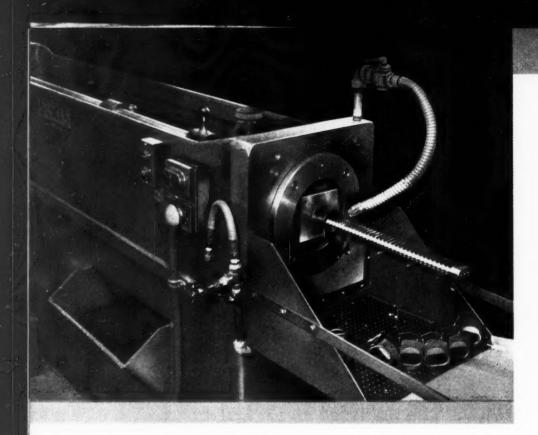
Broaching Equipment Employed for Cleaning out the Elliptical Hole through Motor Mounts Formed by Welding Two Small Forgings together
